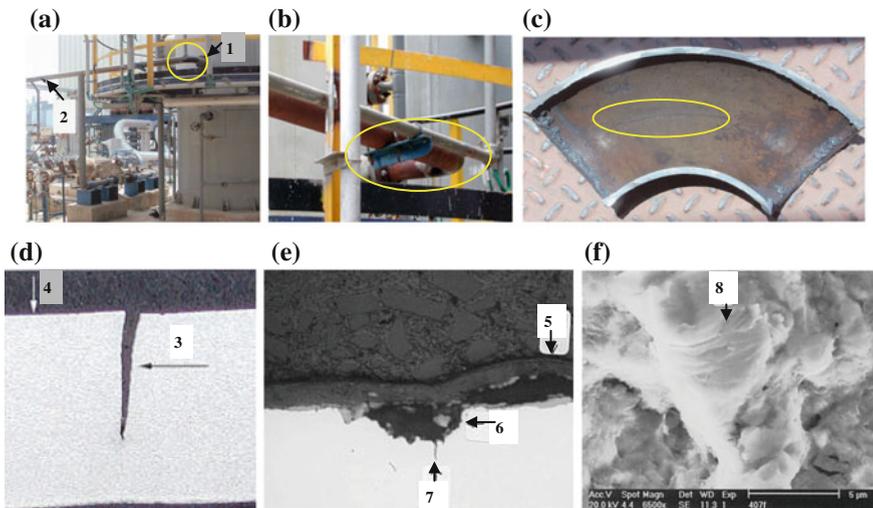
a General view of failed pipe at the HDS unit: 1 location of failed bend, 2 the pipe. b Magnification of the failure area (pipe bend). c The inside of the bend with crack. d Macroscopic cross-section of the bend through the crack: 3 crack, 4 inner surface of the pipe. e Microscopic cross-section ($\times 200$): 5 corrosion products, 6 pit, 7 crack. f SEM photo of the picture e ($\times 6500$): 8 fatigue lines
